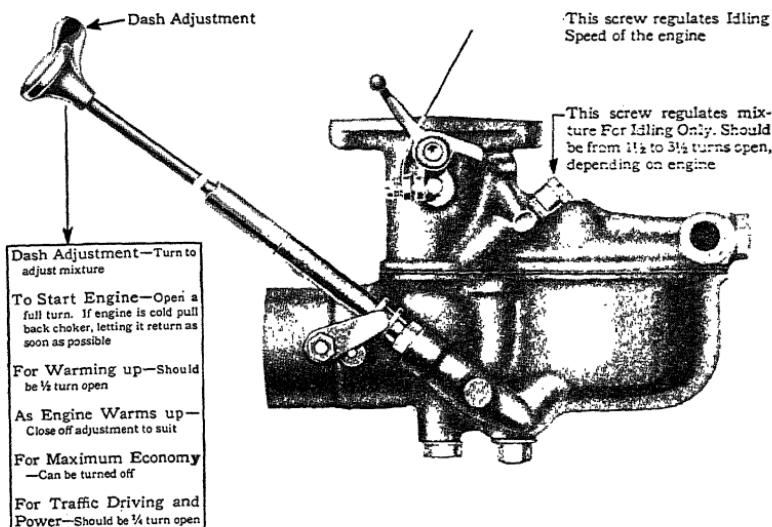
Chart of Adjustments on Ford Model "A" Car Carburetor
